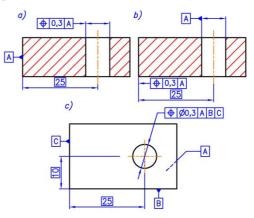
Three examples of possible unambiguous specification of distance between hole axis and a plane using position tolerance: a) datum is plane, b) datum is axis of the hole, c) the hole position is defined in respect to 2 datum system
